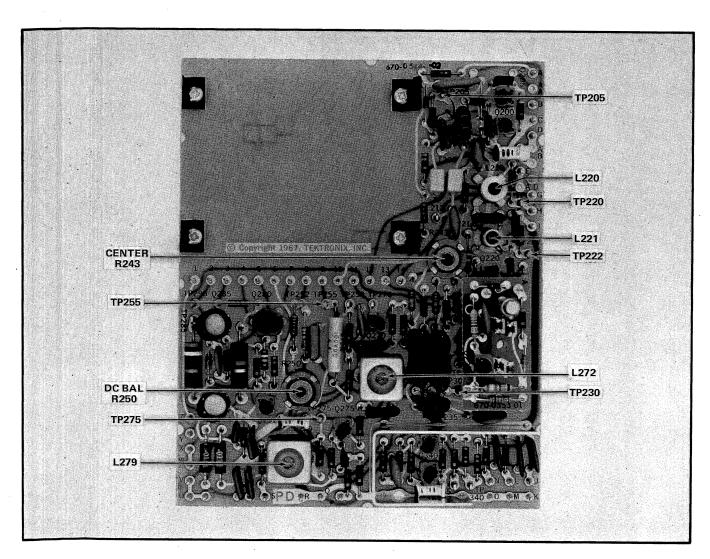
A. Subcarrier regenerator board test point and adjustment locations for instruments SN B251880 and up.
